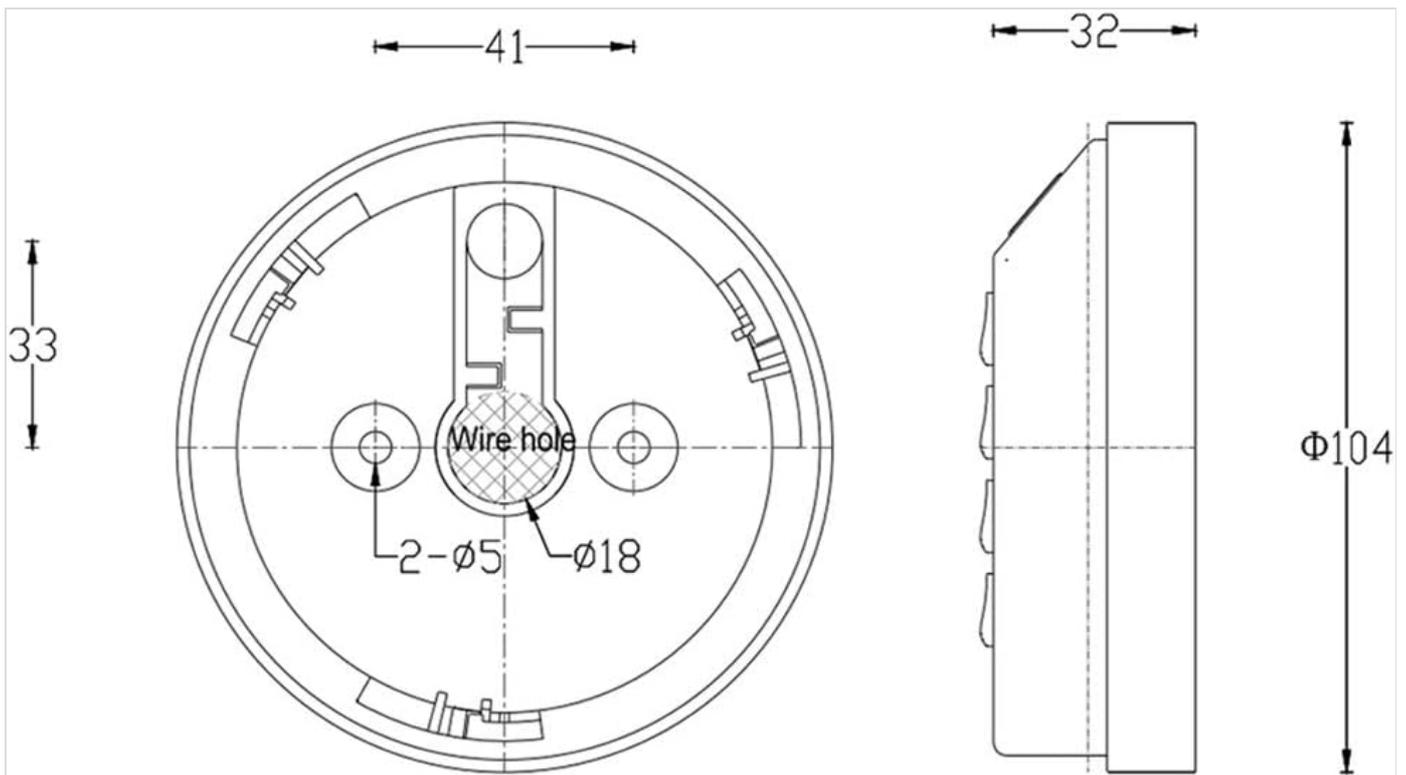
Dimensional drawing of the keypad unit, indicating diameter and depth for mounting.
